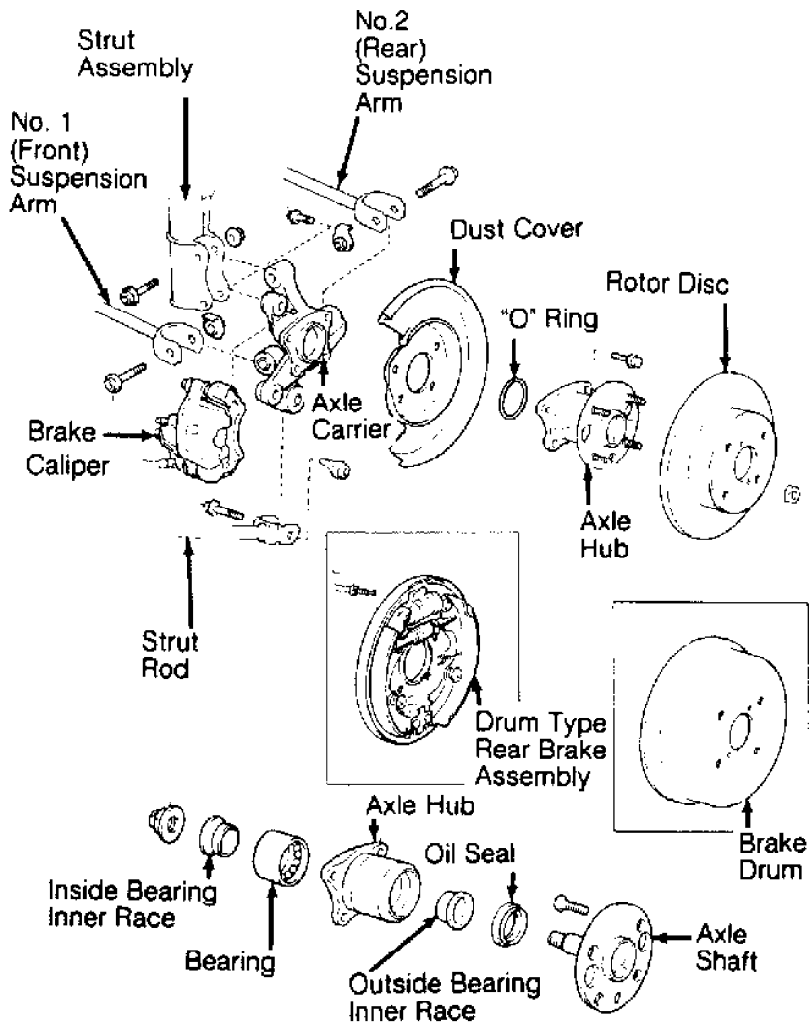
Exploded View Of Typical FWD Rear Axle Components
